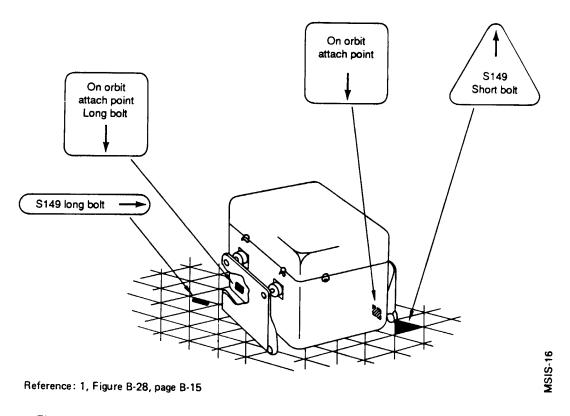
Example of Attachment Interface Markings on Movable Equipment
